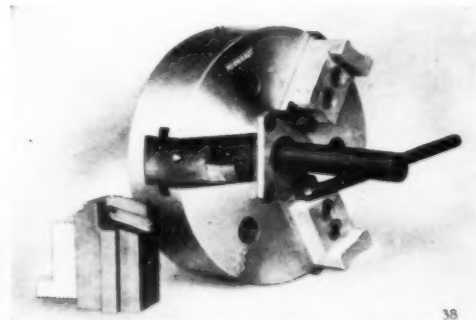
Forkardt Wedge-type Air Chuck, with one Jaw and Jaw Carrier removed to illustrate the form of Wedge.
